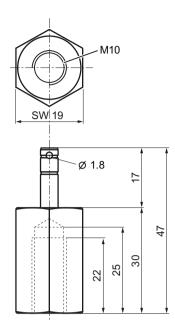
Dimension drawing of quick change holder 6GT2690-0AH10
